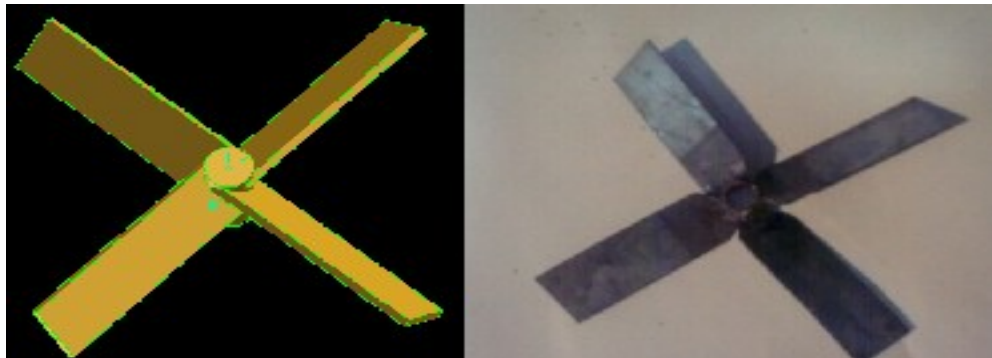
a) CAD model of the Impeller, b) Impeller
